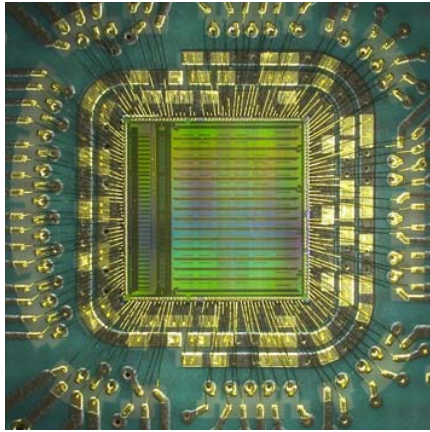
SPADIC1.0 chip bonded to readout PCB.
